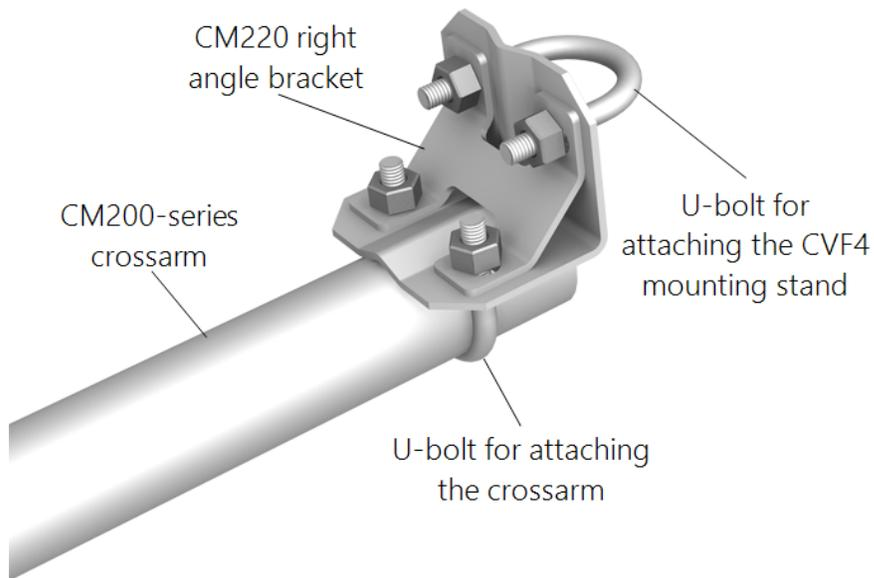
CM220 right-angle mounting bracket attached to CM200-series crossarm
